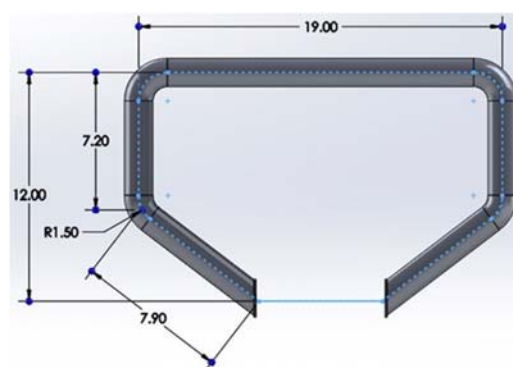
Dimensions for benchmark crash bar from SolidWorks
